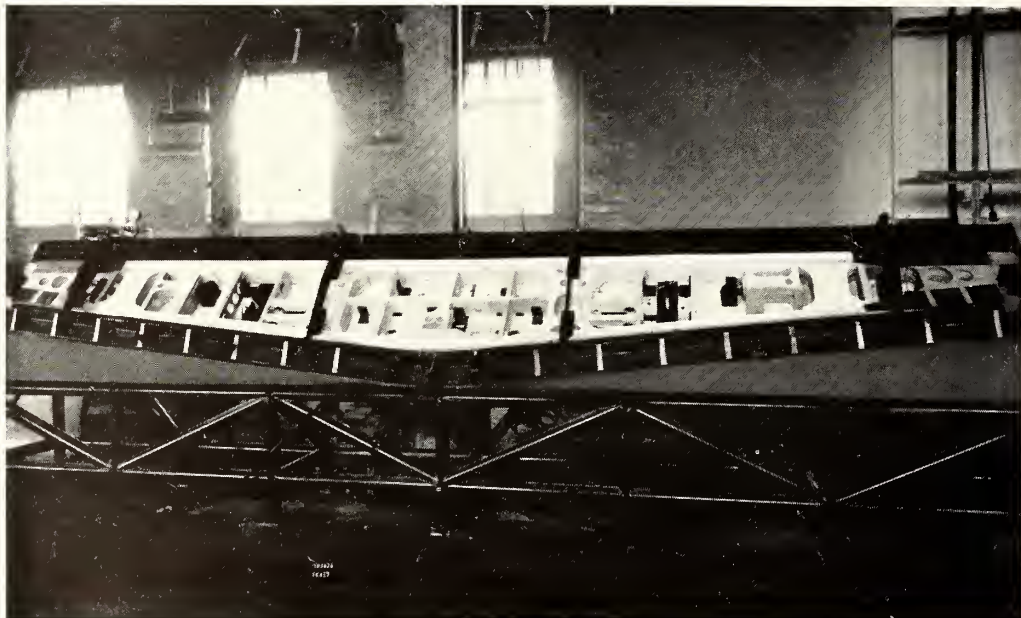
Jig for positioning and gluing filler blocks to spar flanges in a spar of complex design.
